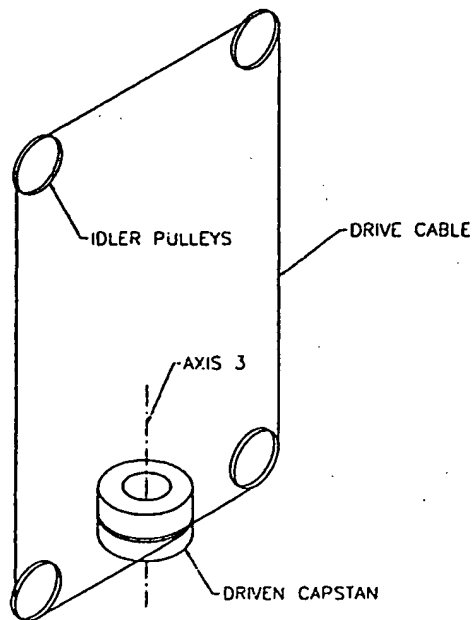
Joint 3, rotation about the instrument shaft, is actuated using a cable drive similar to that in the Silver Falcon. One point of the cable loop shown attaches to a drive cable on the base unit.
